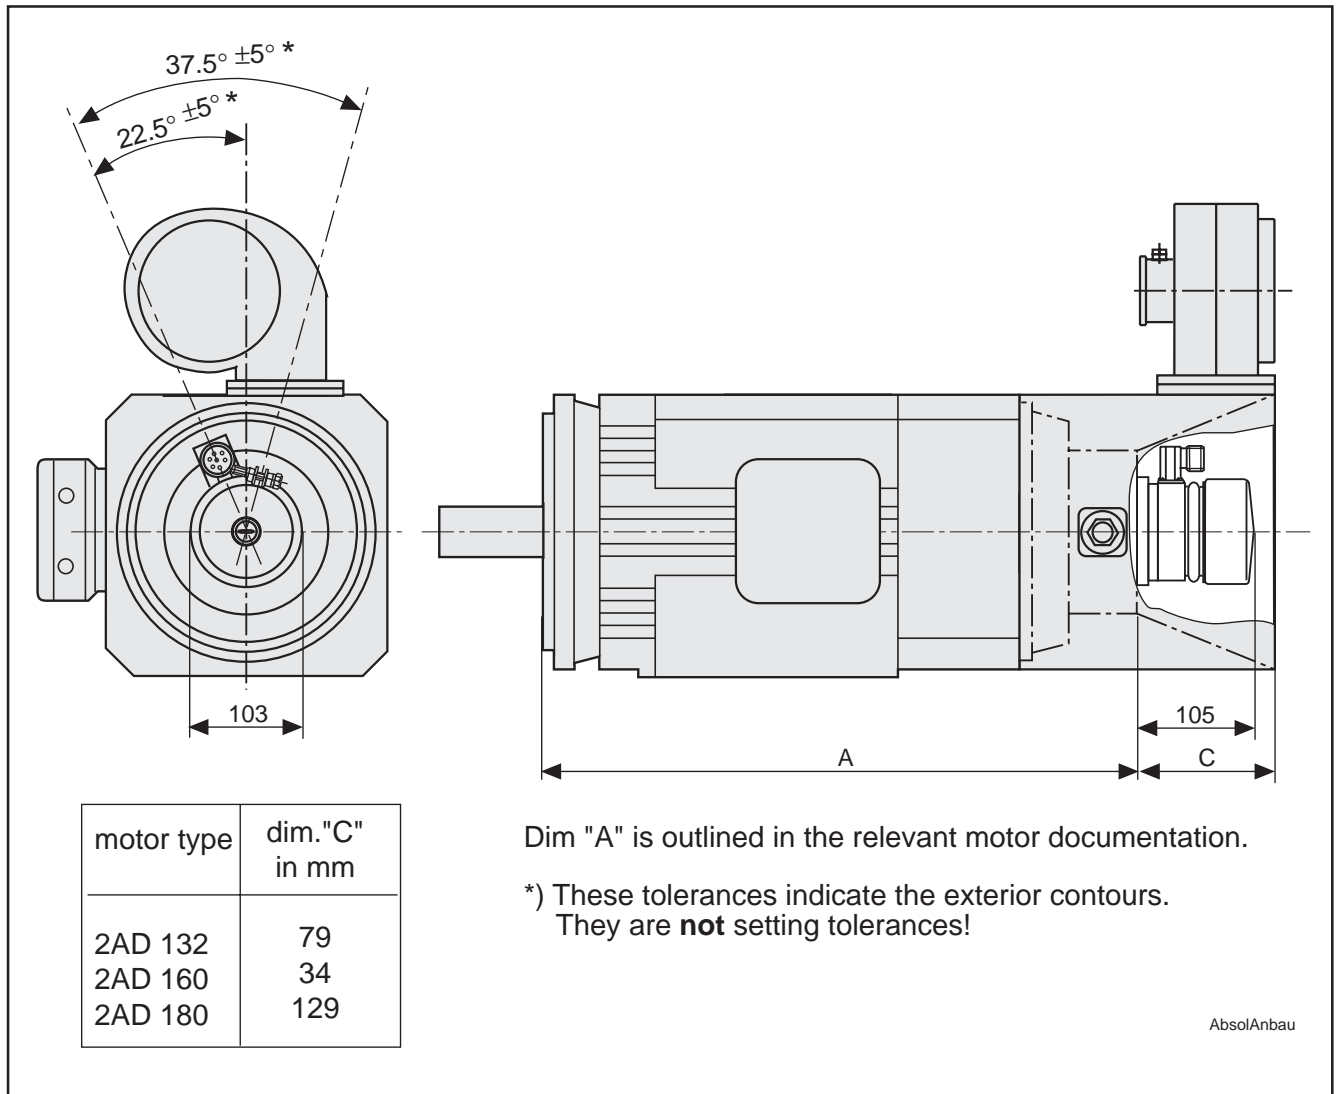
Absolute encoder mounting set AM 174 SG mounted to a 2AD asynchronous motor
